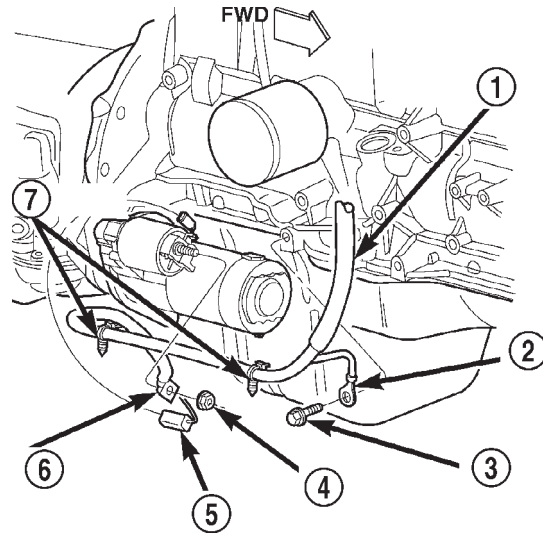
Starter Wire Harness Remove/Install - 4.0L Engine
